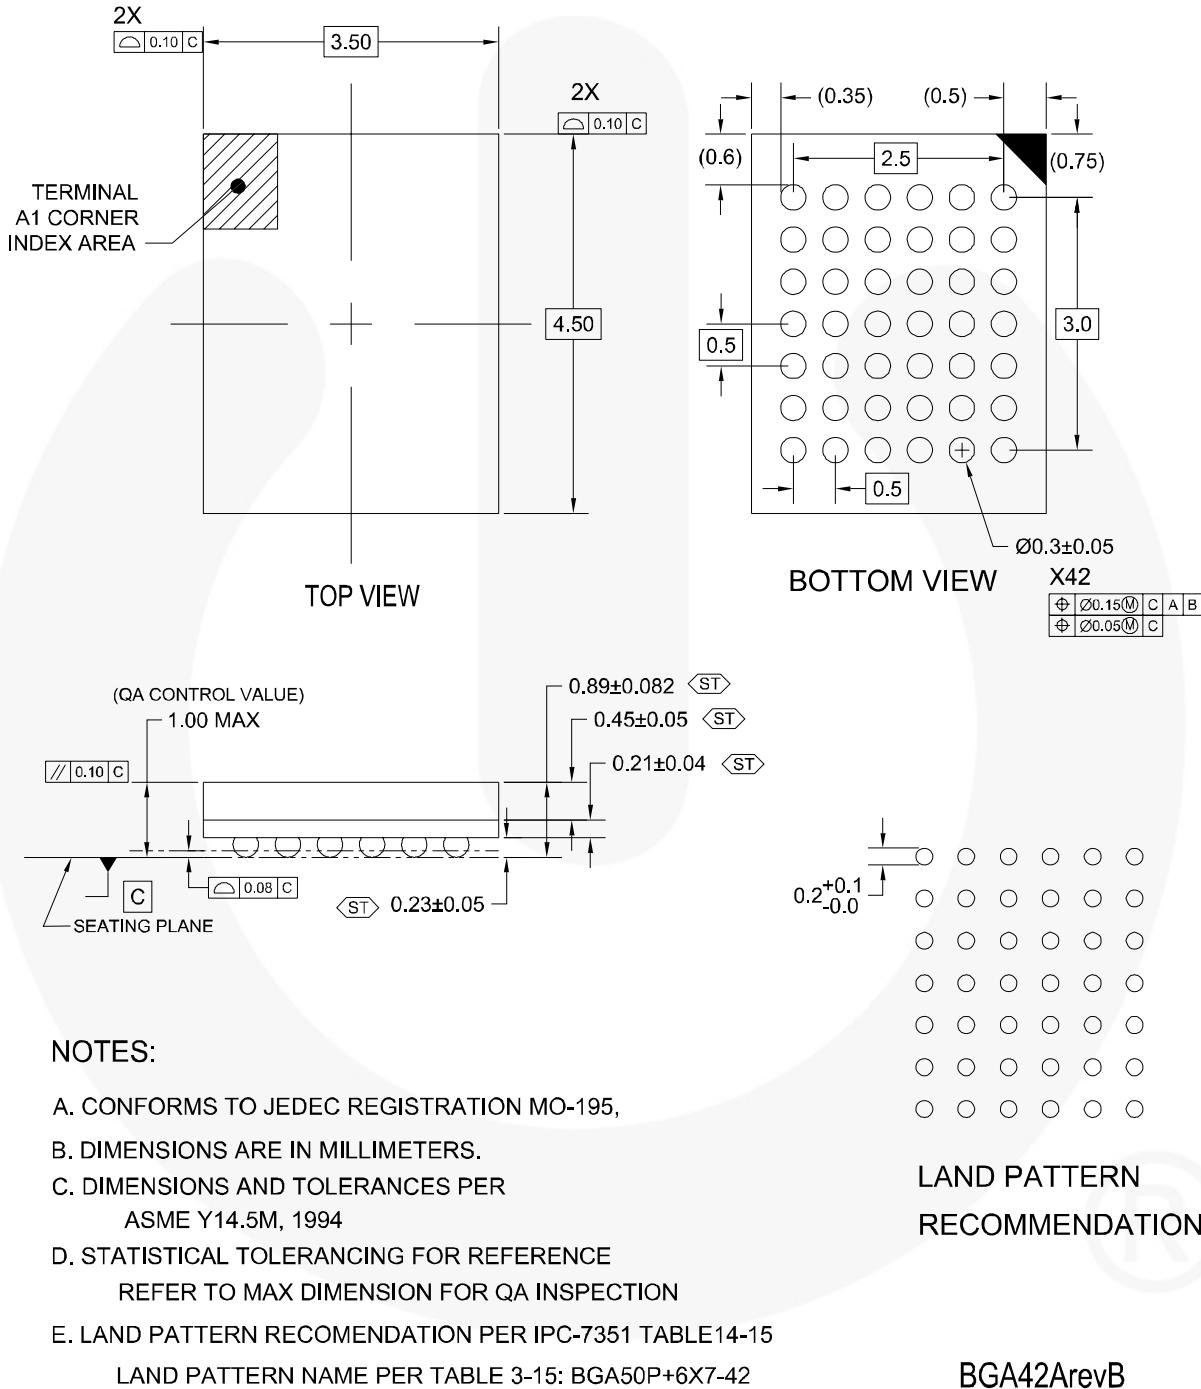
42-Ball, Ball Grid Array (BGA) Package
